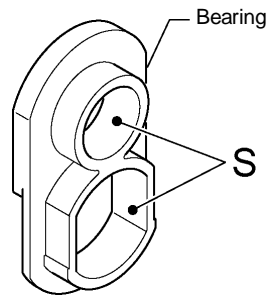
Paper Feed Roller and Paper Feed Sub-roller Shafts
